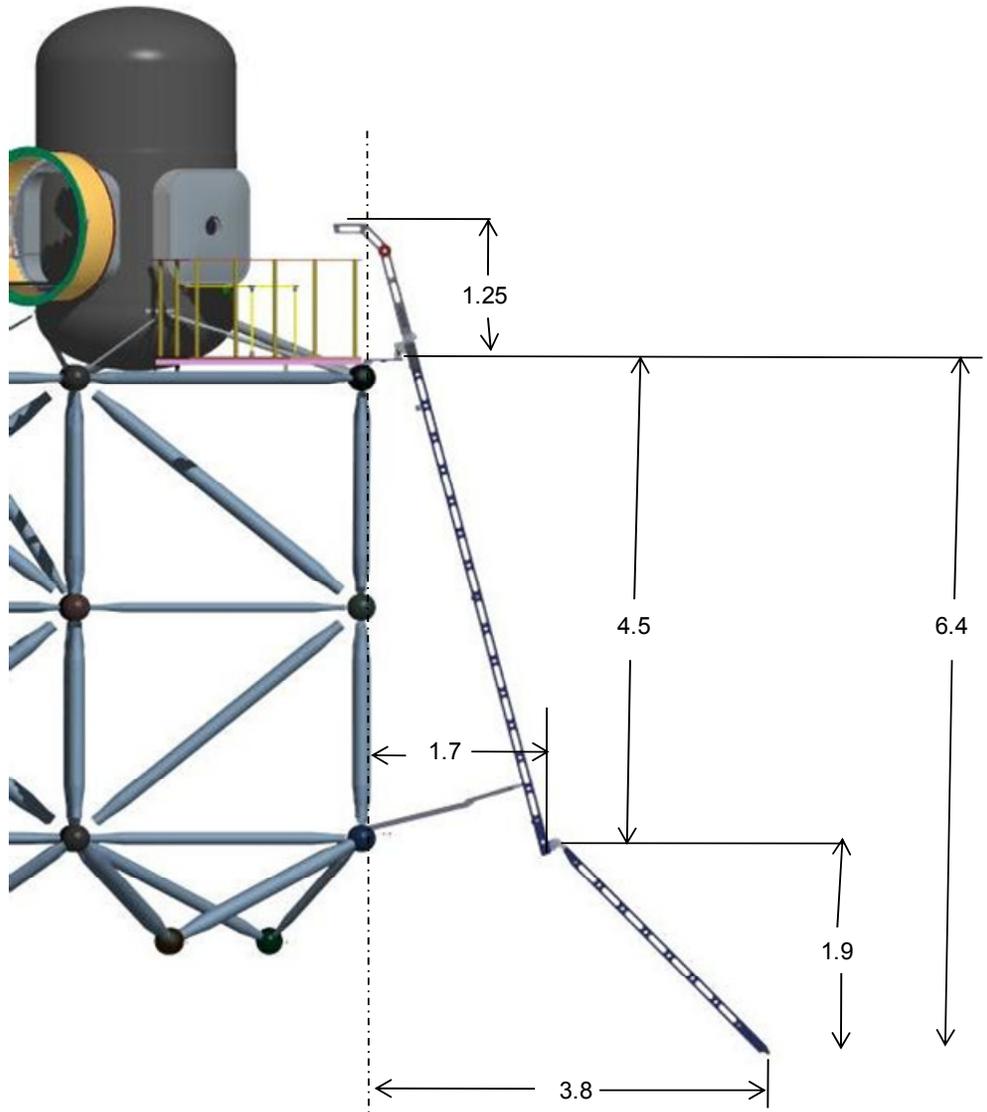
Side view of ladder dimensions used for mock-up fabrication (dimensions in meters); note that the ladder used during mission did not have two segments and different angles.
